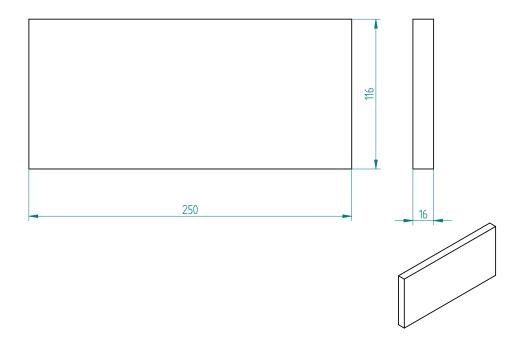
Shaped part : face-2-outsourcing for perpendiculator tool
